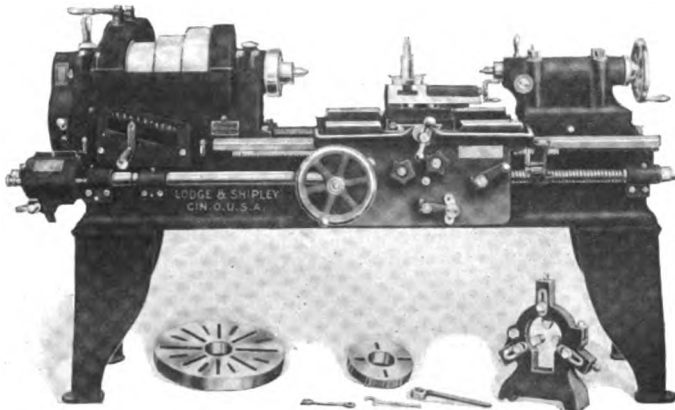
18" 3-Step Cone Double-Back Geared Engine Lathe
